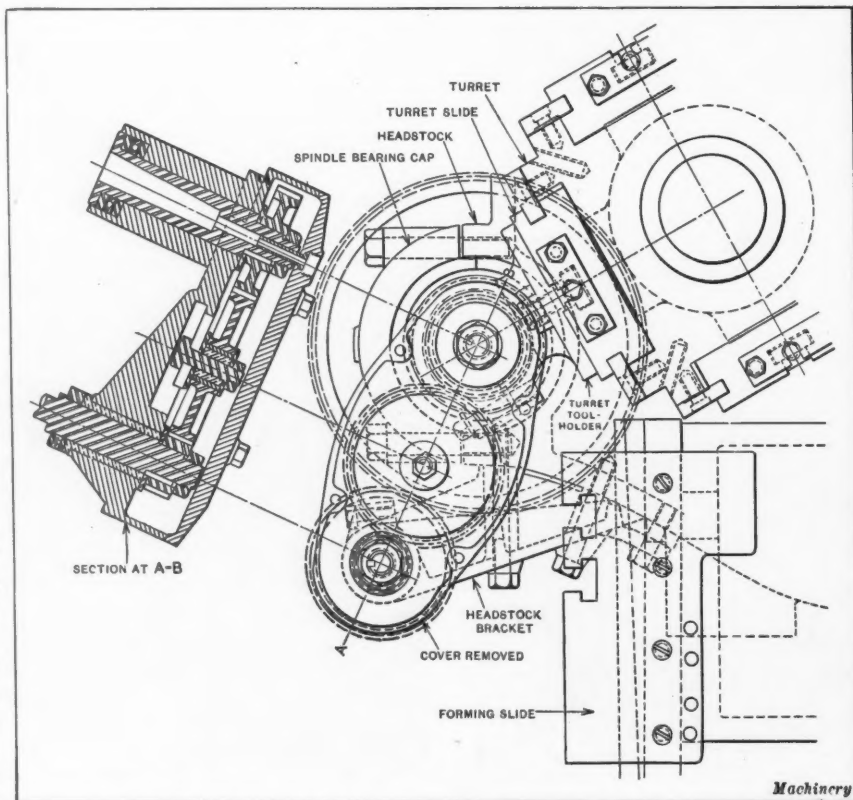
End Elevation and Sectional View of Attachment shown in Fig. 23
